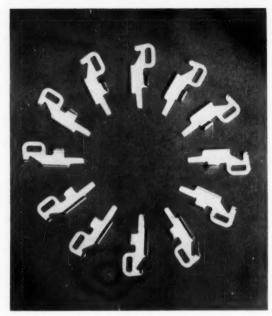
Plated parts show no contact marks, have uniform deposit.
